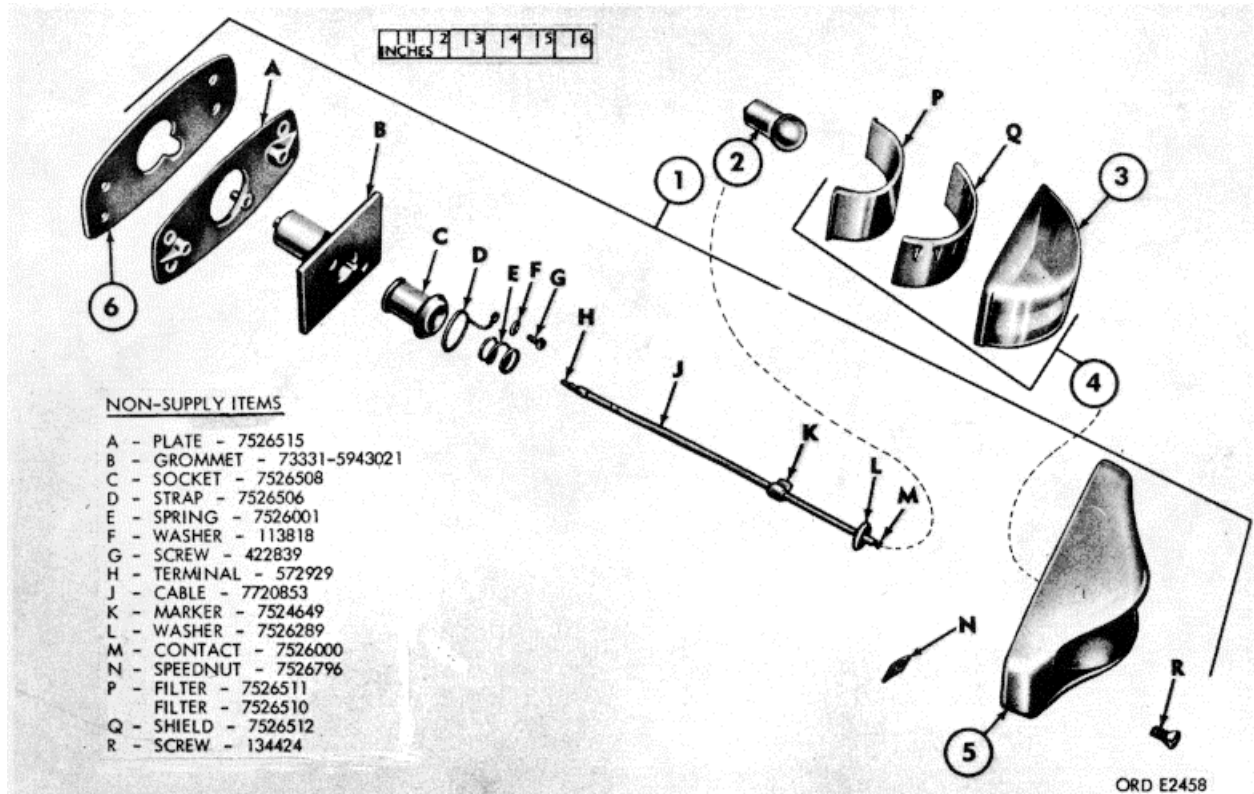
CLEARANCE LIGHT-EXPLODED VIEW.
